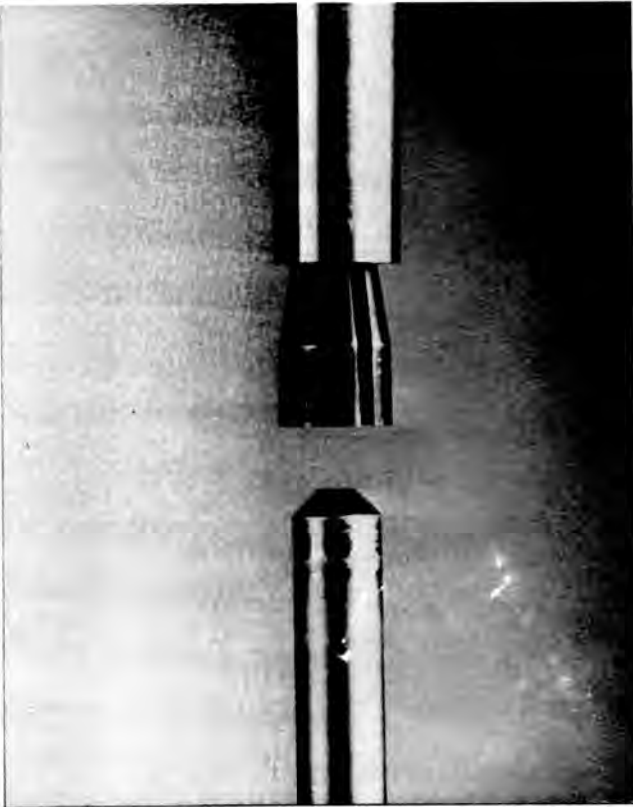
Fuel Rod Puller Approaching Fuel Rod.
